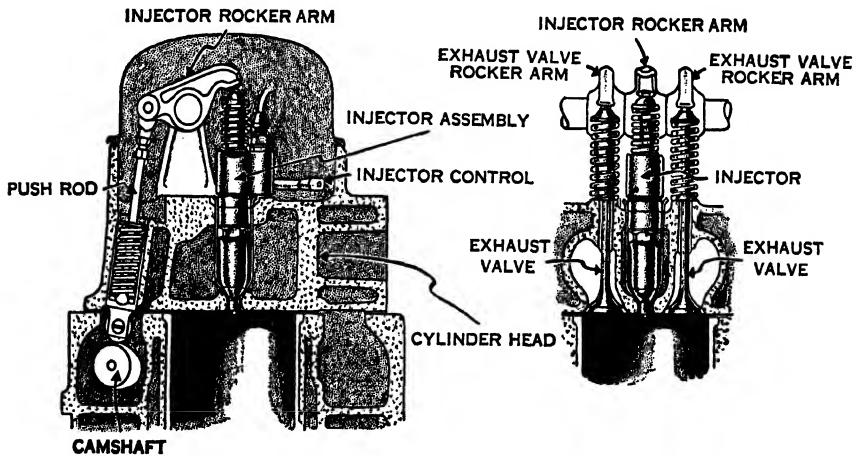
Unit injector in a two-cycle engine with exhaust valves. (Courtesy General Motors Corp.)
